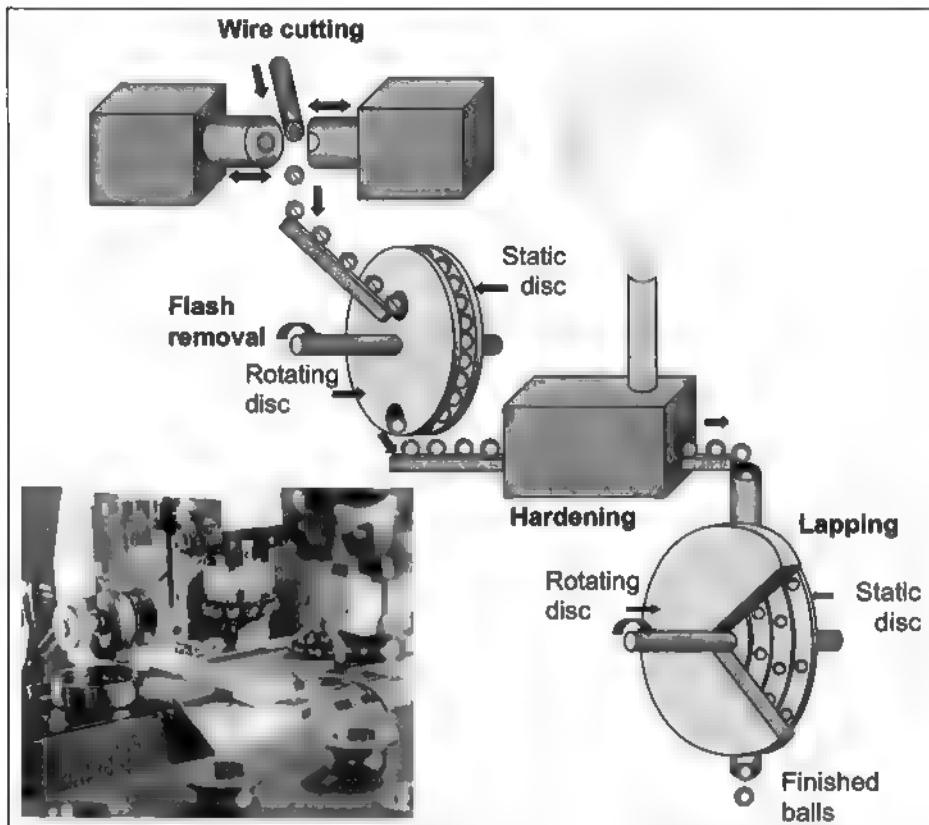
Diagrammatic view of the manufacture of balls. Inset, automated assembly of bearings. Photo courtesy Schaeffler UK.
